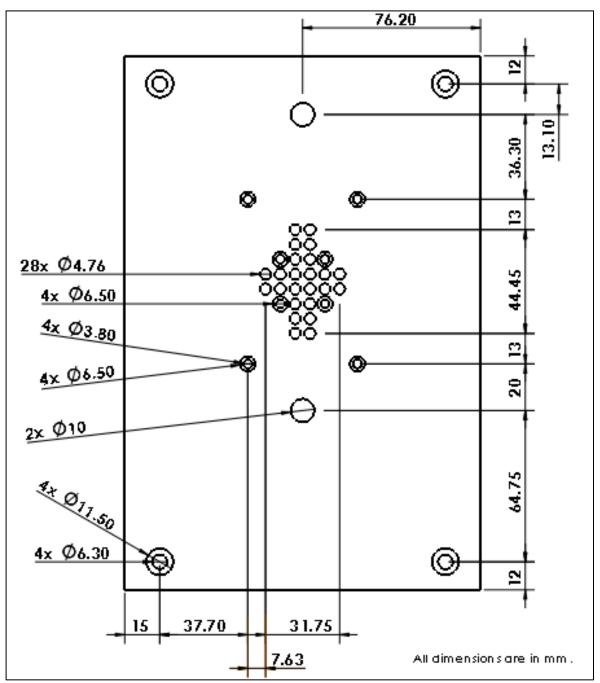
(e) Design with dimensions of sides # 1 and 3 of the payload
